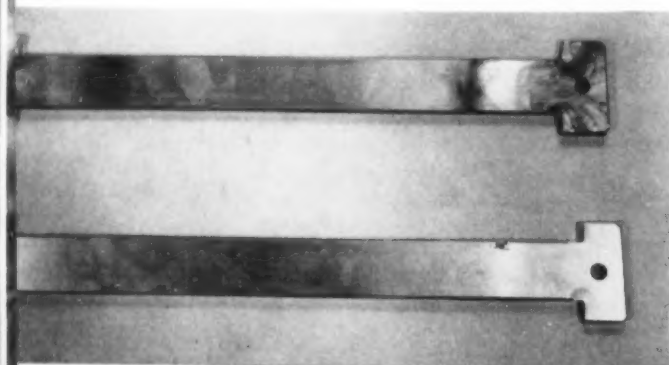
Plate-type length gages with torch-welded hard-faced gaging surfaces.
